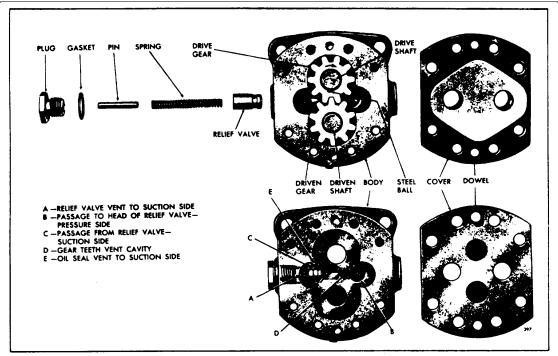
Fuel Pump Valving and Rotation (Right Hand Pump Shown)
